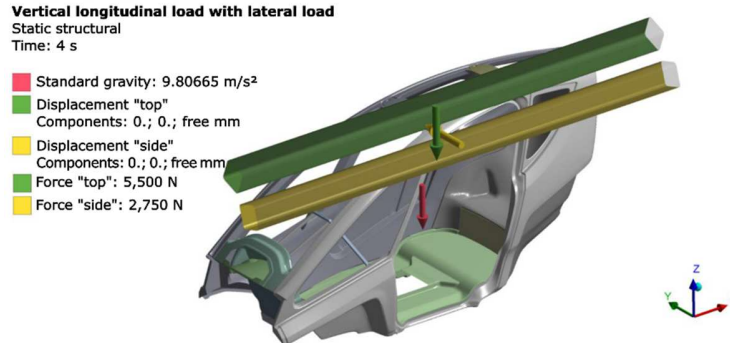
Vertical-longitudinal loading with horizontal force component design model – P1.3.
